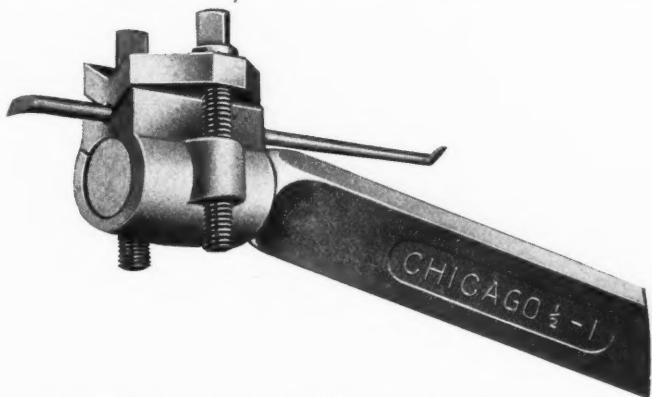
Holder in Use with Forged Boring Tool of Small Diameter.
